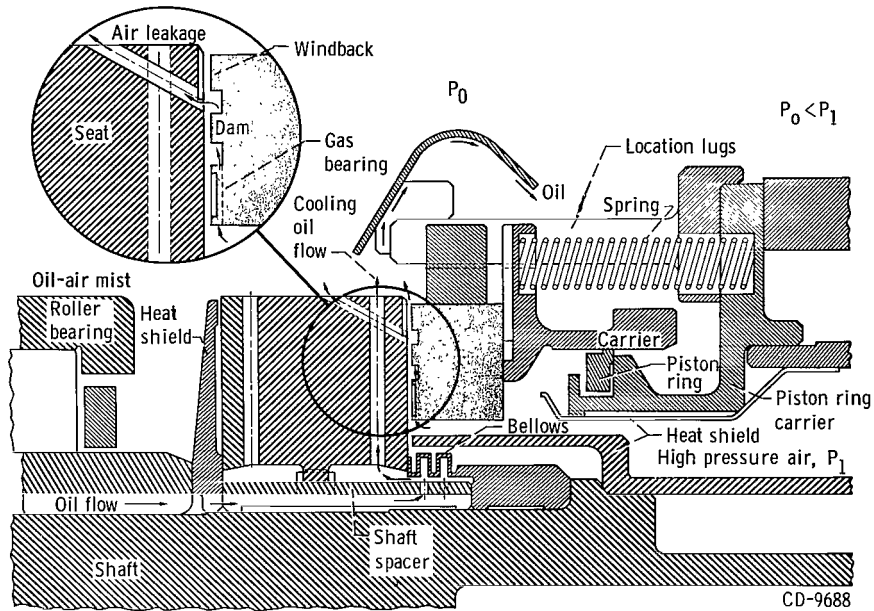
Face contact seal with hydrodynamic gas bearing for lift augmentation.
